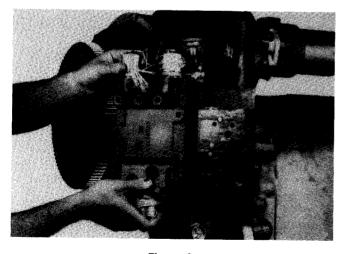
Remove two valve to converter housing capscrews. Install two aligning studs as shown. Remove remaining capscrews. Remove control valve and gasket.
